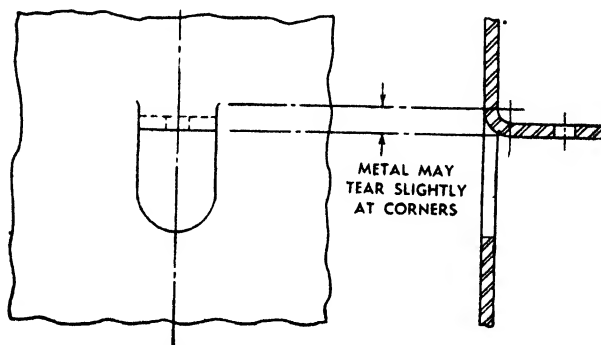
Tab that is sheared on three sides and formed or bent outward.
